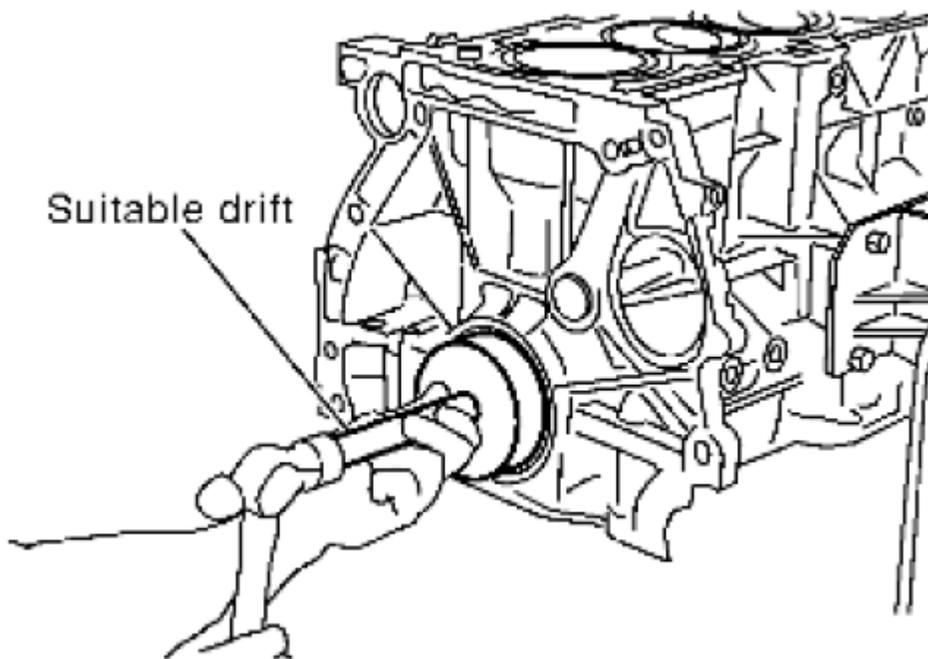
Installing Rear Oil Seal Using Suitable Tool
